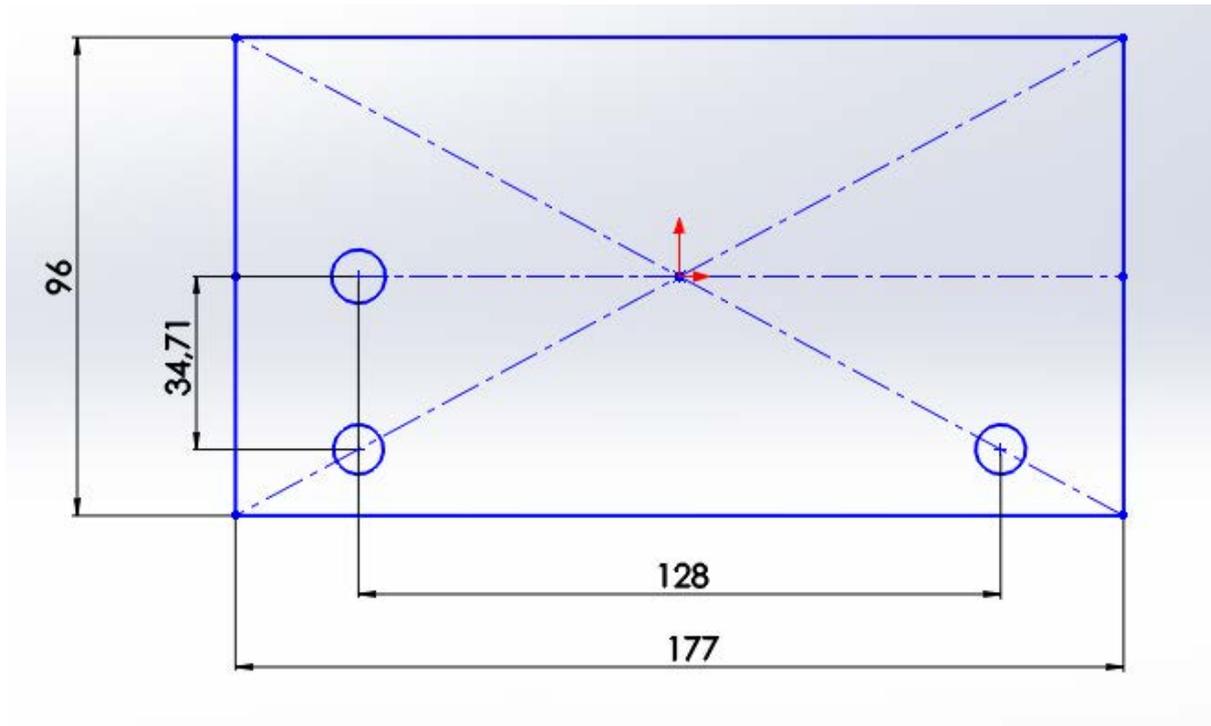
Assumed general dimensions for the graphite block and hole positioning
